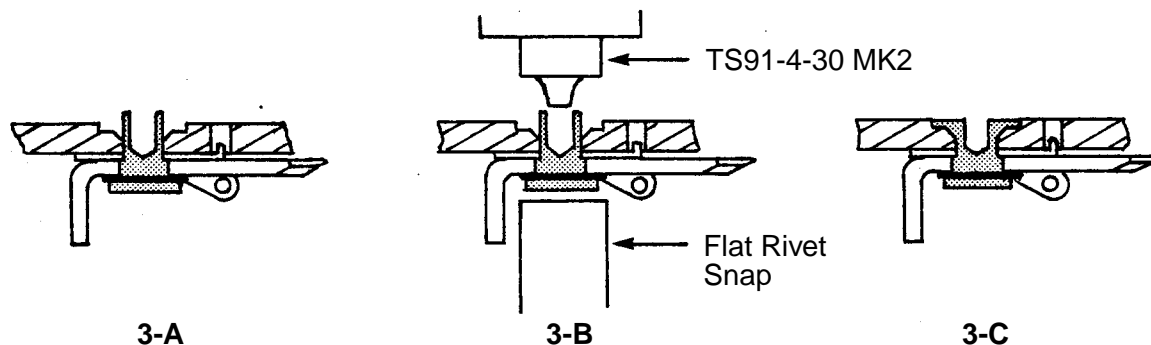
Installation of Slide Assembly with a MS21332-31 Rivet
